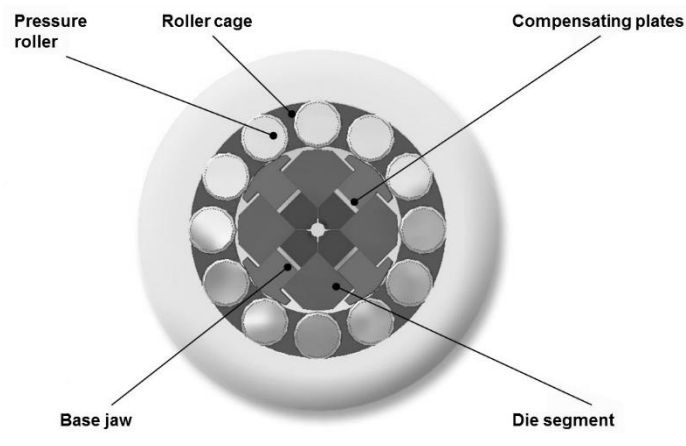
Swaging with the mold cavity in the middle and the working mechanism [81].
